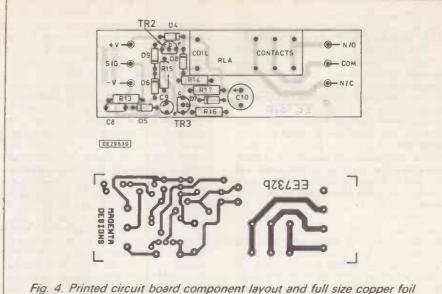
Printed circuit board component layout and full size copper foil master for the relay board. The completed board is shown below.
